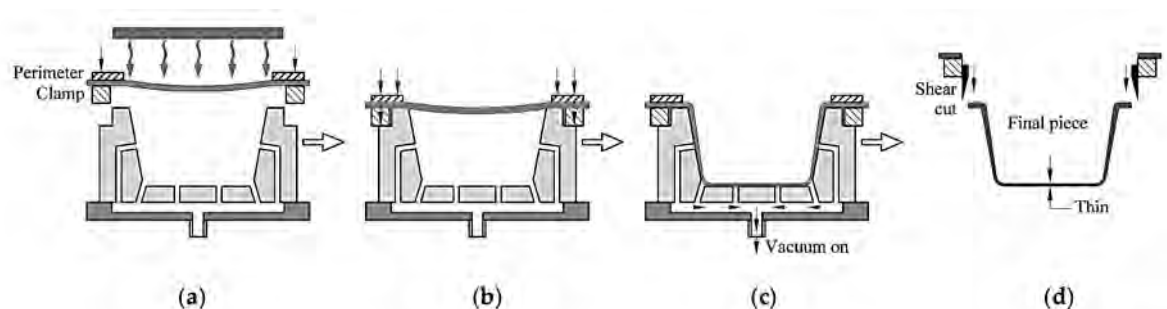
Schematic of basic vacuum thermoforming. (a) Heating; (b) sealing or pre-stretch; (c) forming and cooling; and (d) demolding and trimming.
